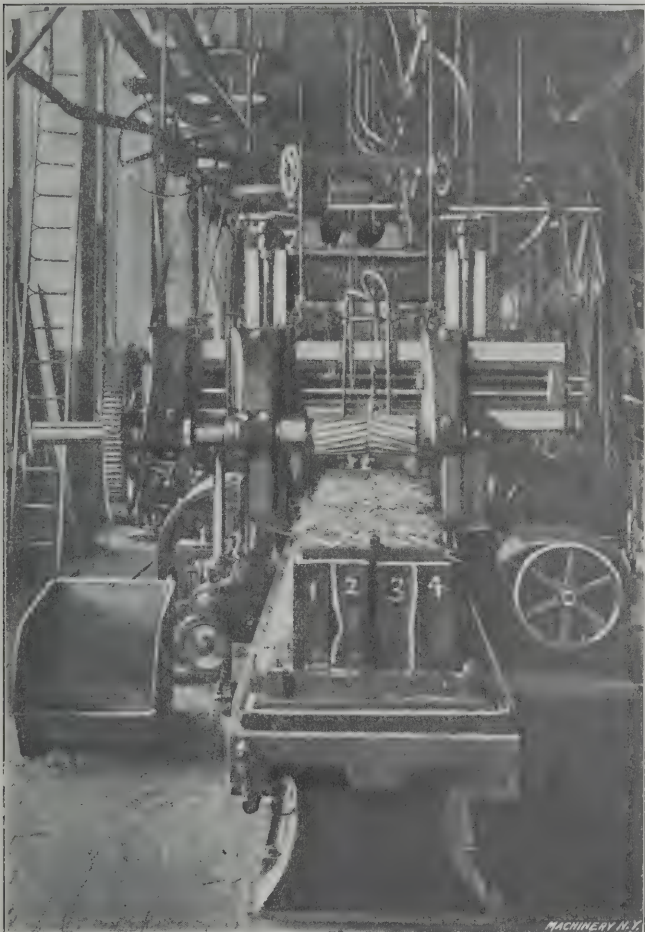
Finishing the Top and Bottom Edges of the Main Rods in the Slab Milling Machine
